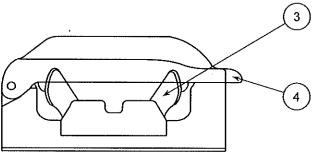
Blood Pump, Plasma Pump, and Replacement Fluid Pump
